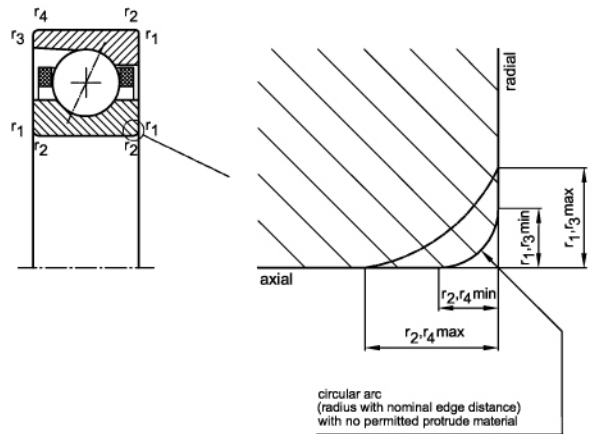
Dimensional drawing of chamfer dimensions according to DIN 620, Part 6
